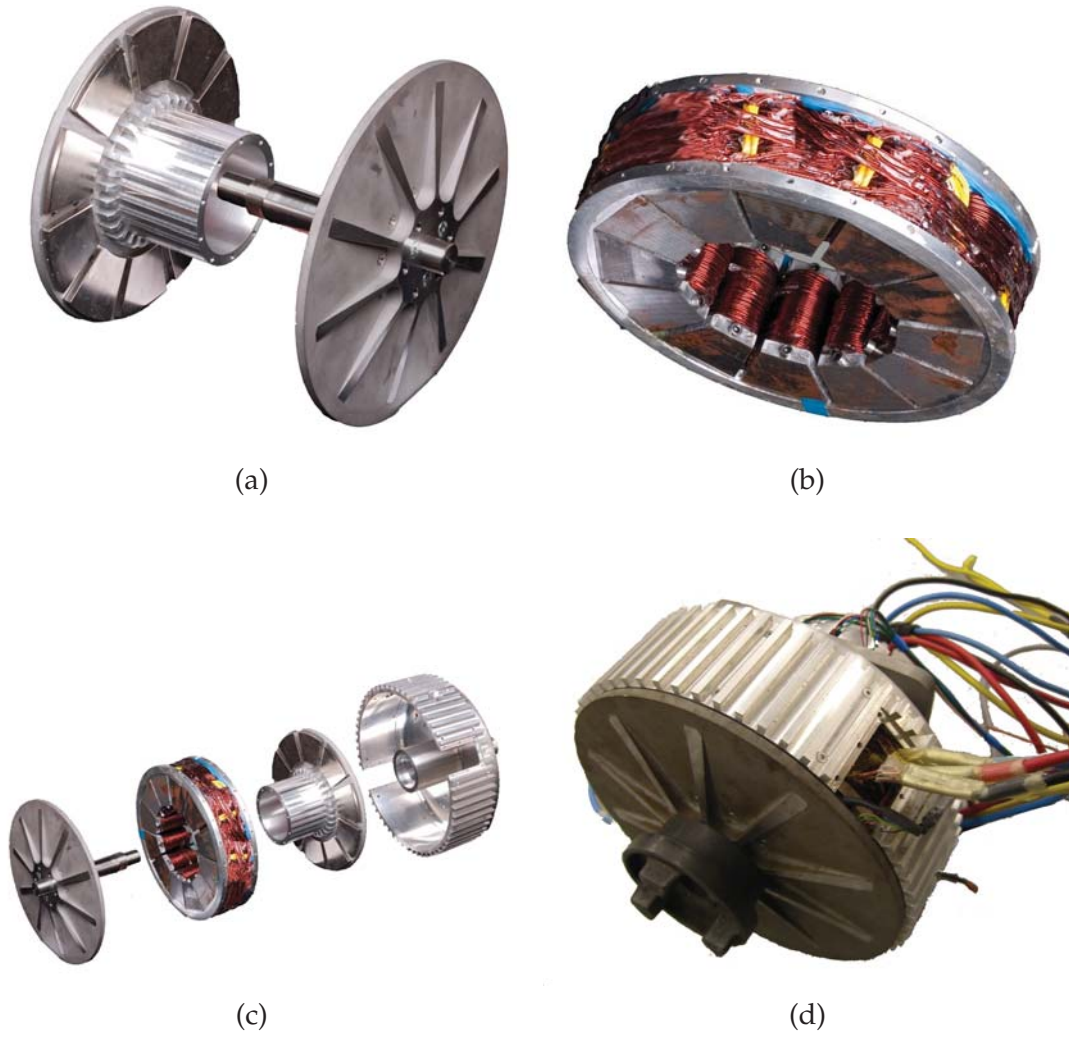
The prototype machine: (a) rotor; (b) stator; (c) exploded view of the machine; (d) assembled machine.
